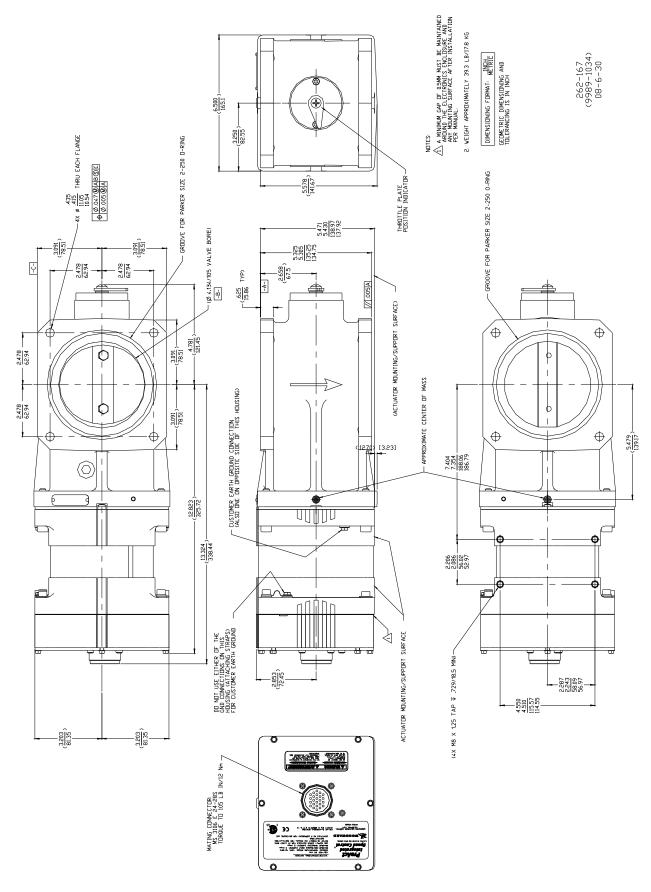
Outline Drawing of PISC ITB 105 mm
